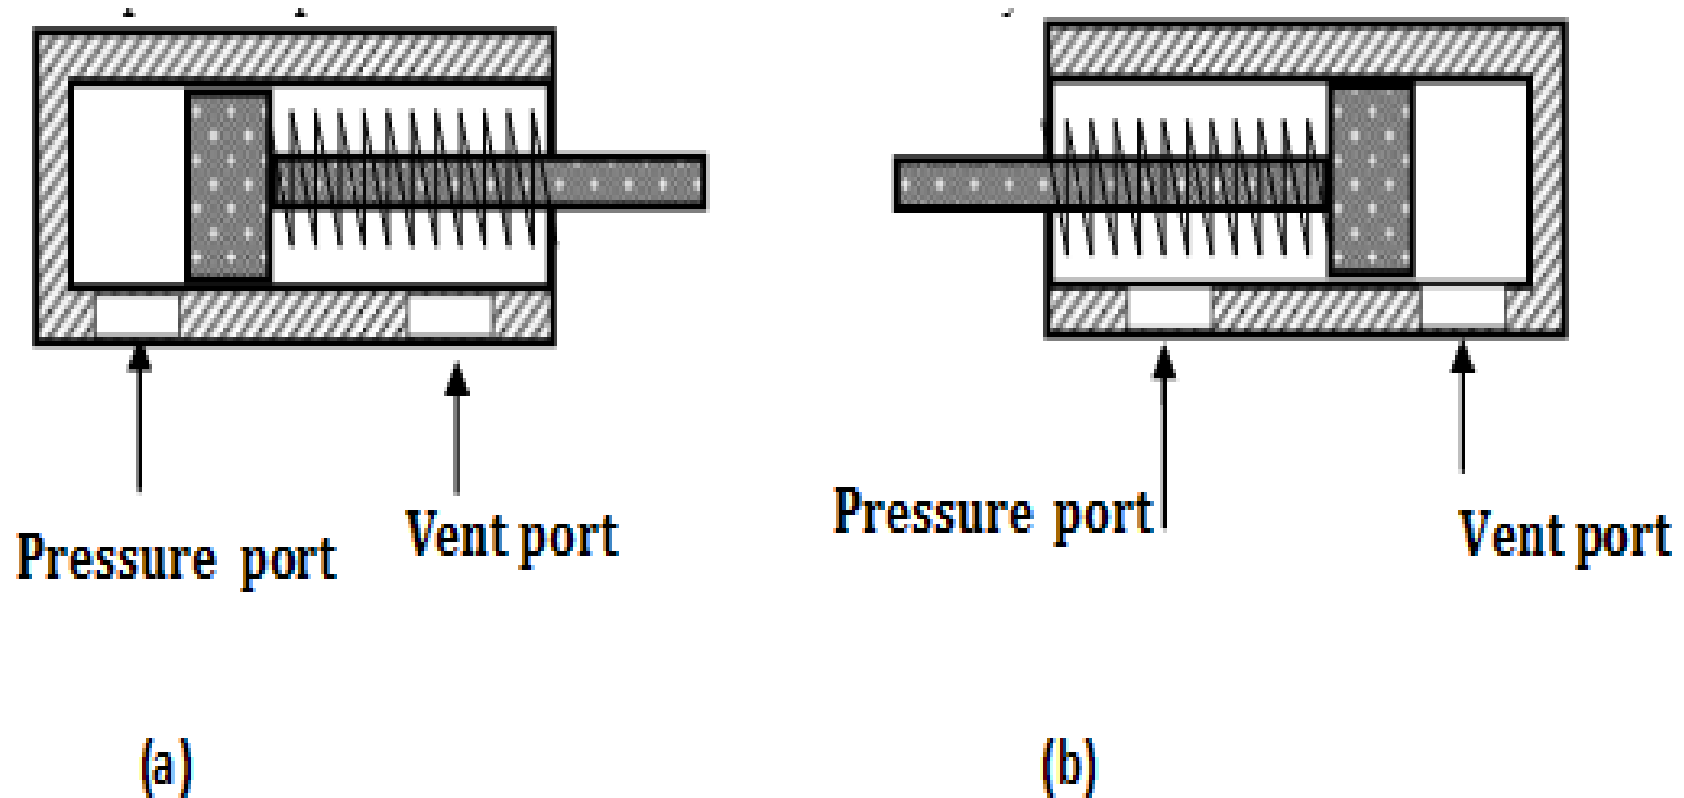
(a) Push- and (b) pull-type single-acting cylinders
